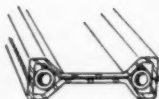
Pressed steel section formed from light gauge metal. Use formed section for welded section. Welding and Automatic Lincoln welded at outer edges. Weights 80% less than Figure 1.
